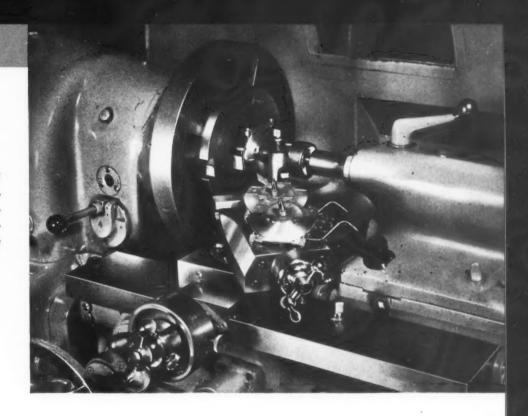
Special Fixture for Cutting Air Nozzle Slits, Employing Small Milling Saws Geared to the Drilling Machine Spindle
